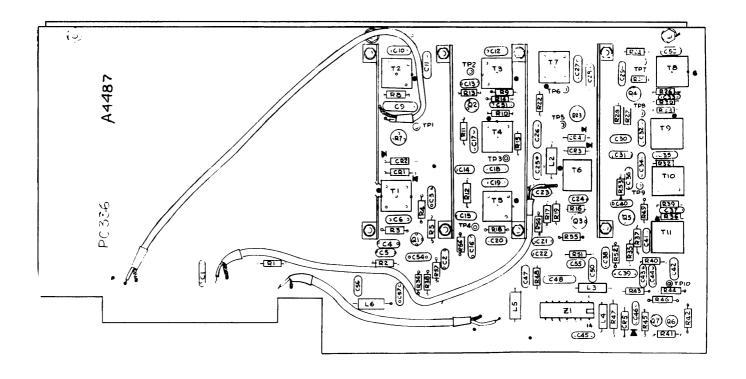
Single Mixer-Divider Z104, Board Component Locations
